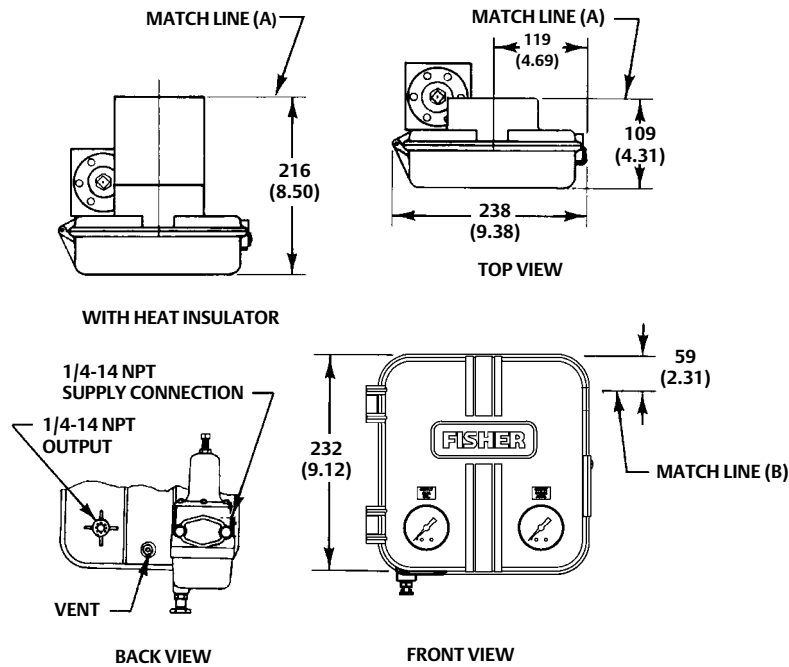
Fisher 249W Dimensions for Mounting on Customer Supplied Cage
